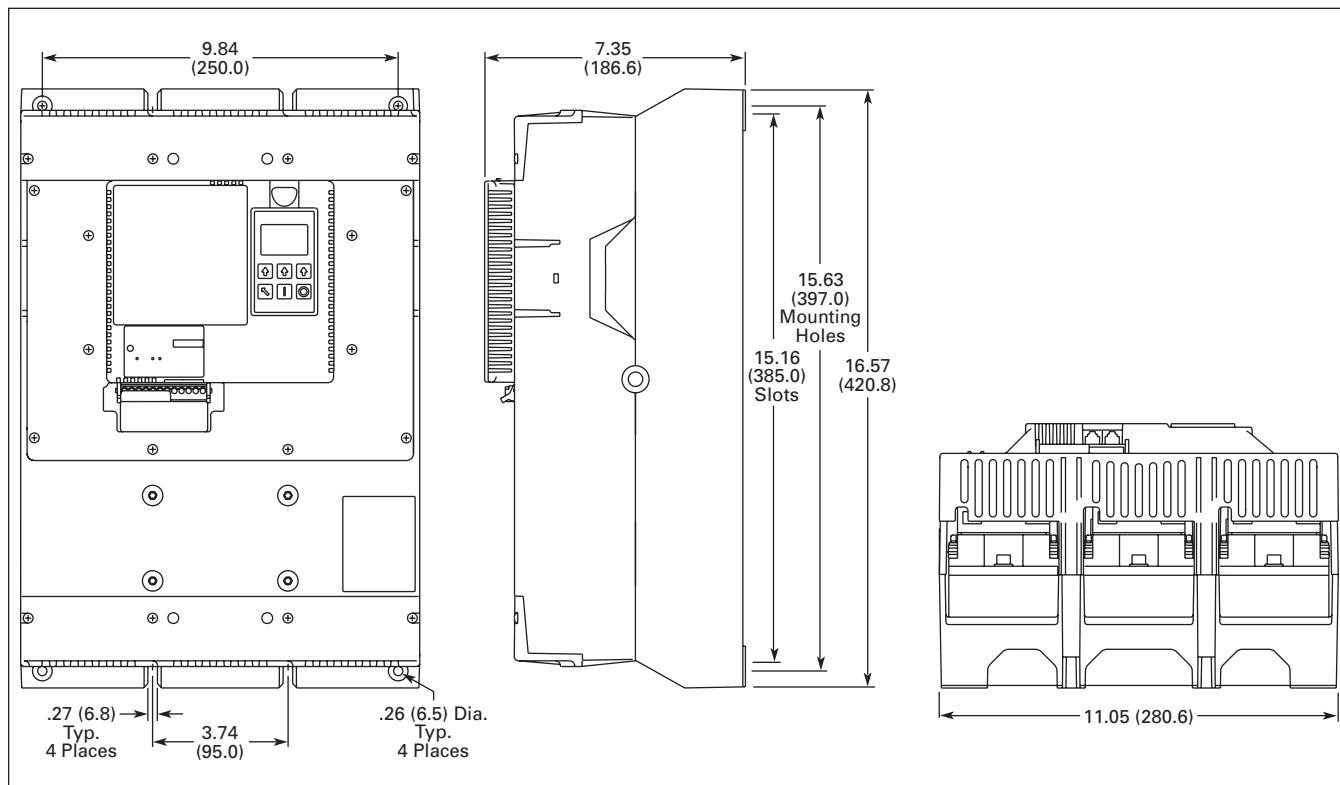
V-Frame (290 mm) S811 Approximate Dimensions in Inches (mm)
